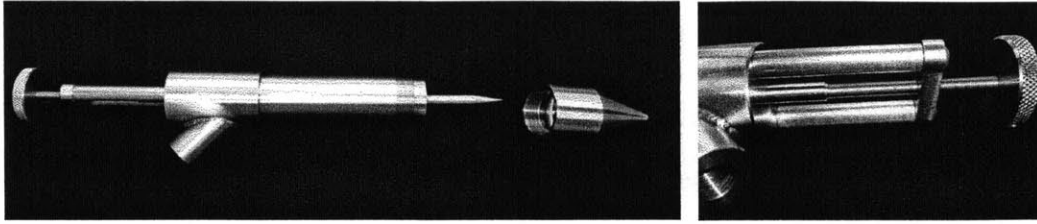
Experimental nozzle assembly (left) with close up view of the valve adjustment mechanism (right)
